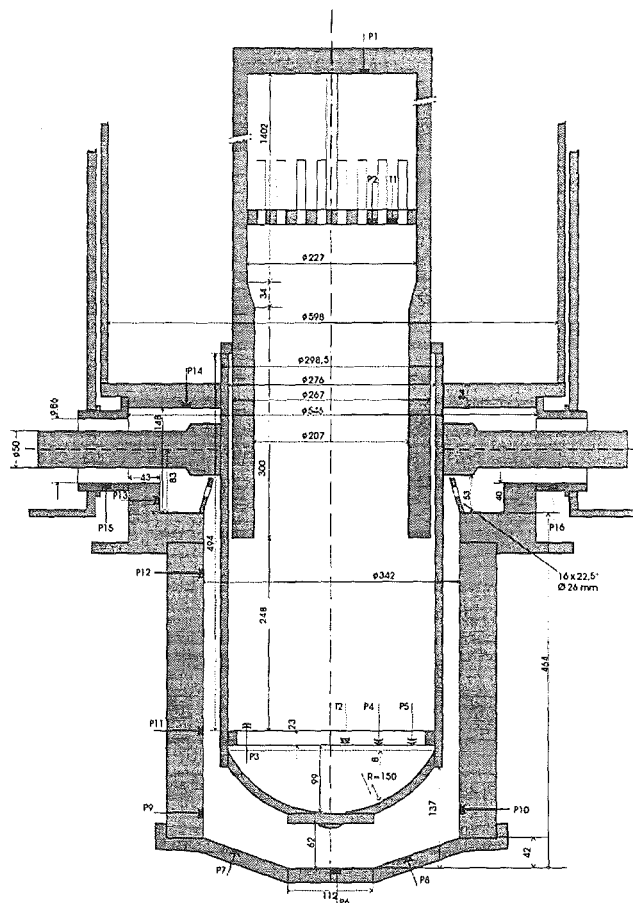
The configuration of the pressure vessel with a rupture disk at the lower head (dimension in mm).
